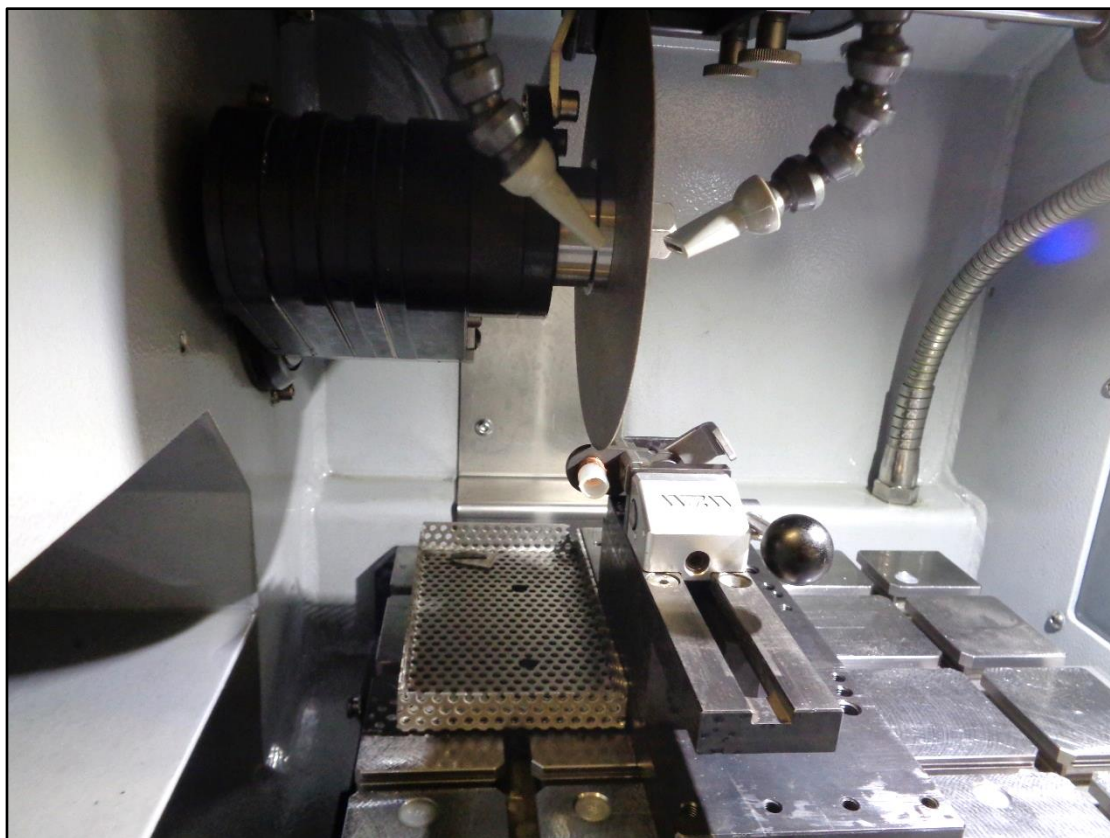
Overview of the cutting process and clamping in Brilliant 220
